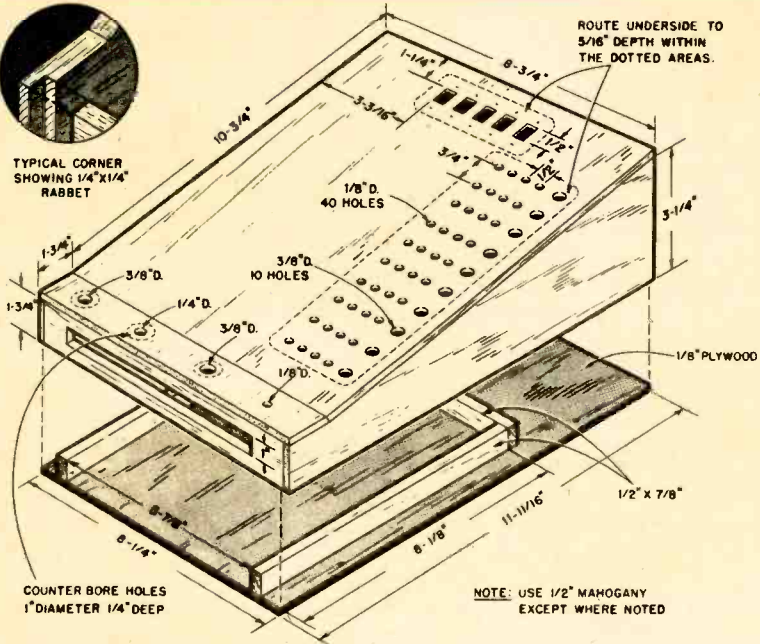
Construction details for cabinet shown on our cover. Dimensions are flexible and may be changed to suit your requirements. Size of card for our machine is 8½ x 5½ in. Slit in front permits access to the card storage area.
